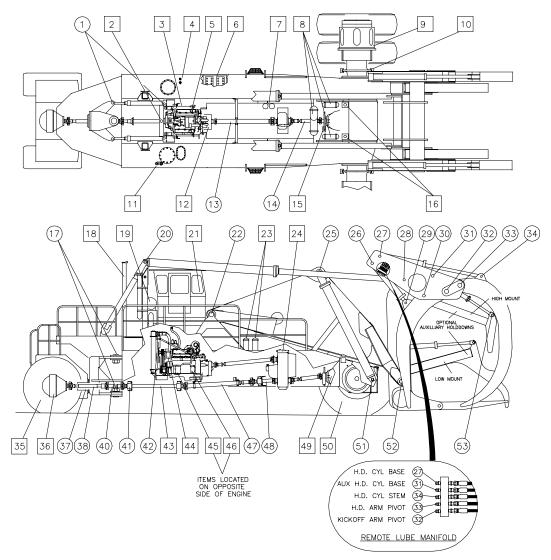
Daily Maintenance and Service Check Points, Typical Four-Wheel Drive Machine
